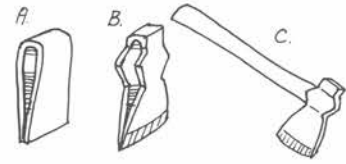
Fabrication of the boat hatchet. The head is folded, shaped, and filled with solder or epoxy (A, B). The filler is bored out at the socket and a handle is fitted (C).
